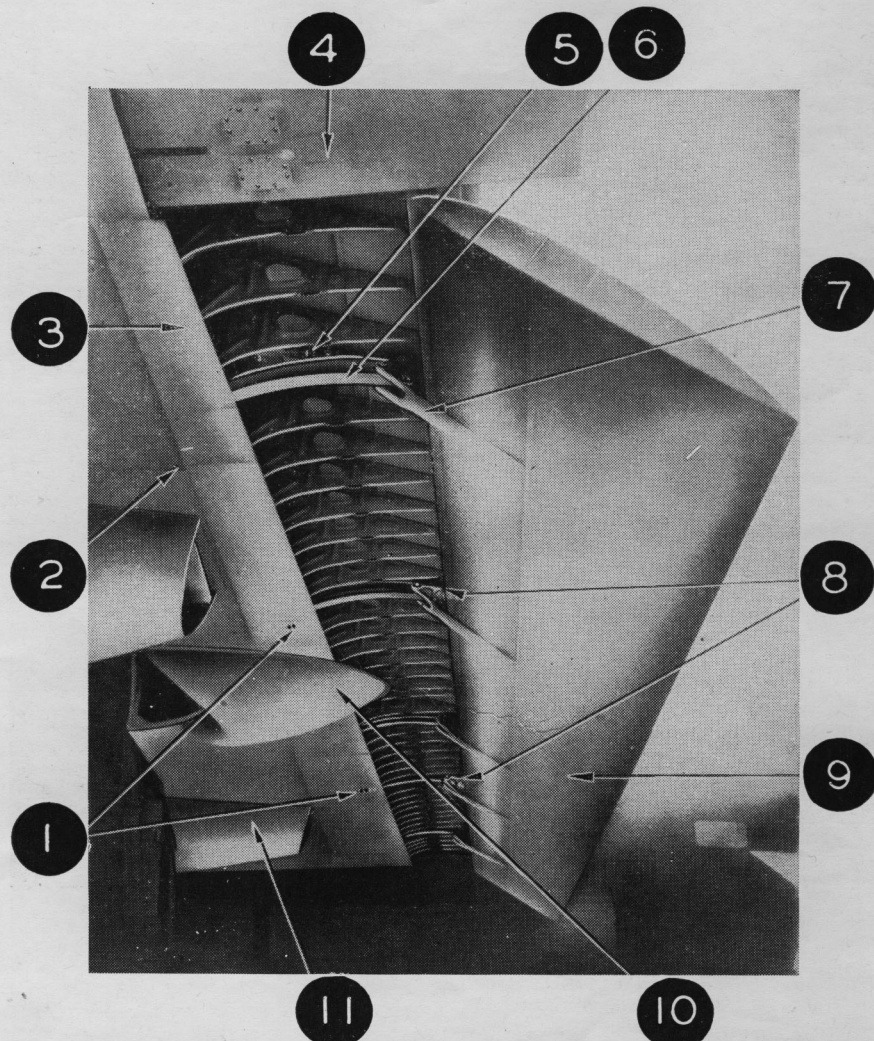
Fowler-flap installation showing (1) up-stop inspection slots; (2) wing splice; (3) wing T.E.; (4) aileron; (5) flap-track support; (6) flap track; (7) flap carriage; (8) flap extending cable attachments; (9) flap; (10) wheel well fairing; (11) engine nacelle fairing.
